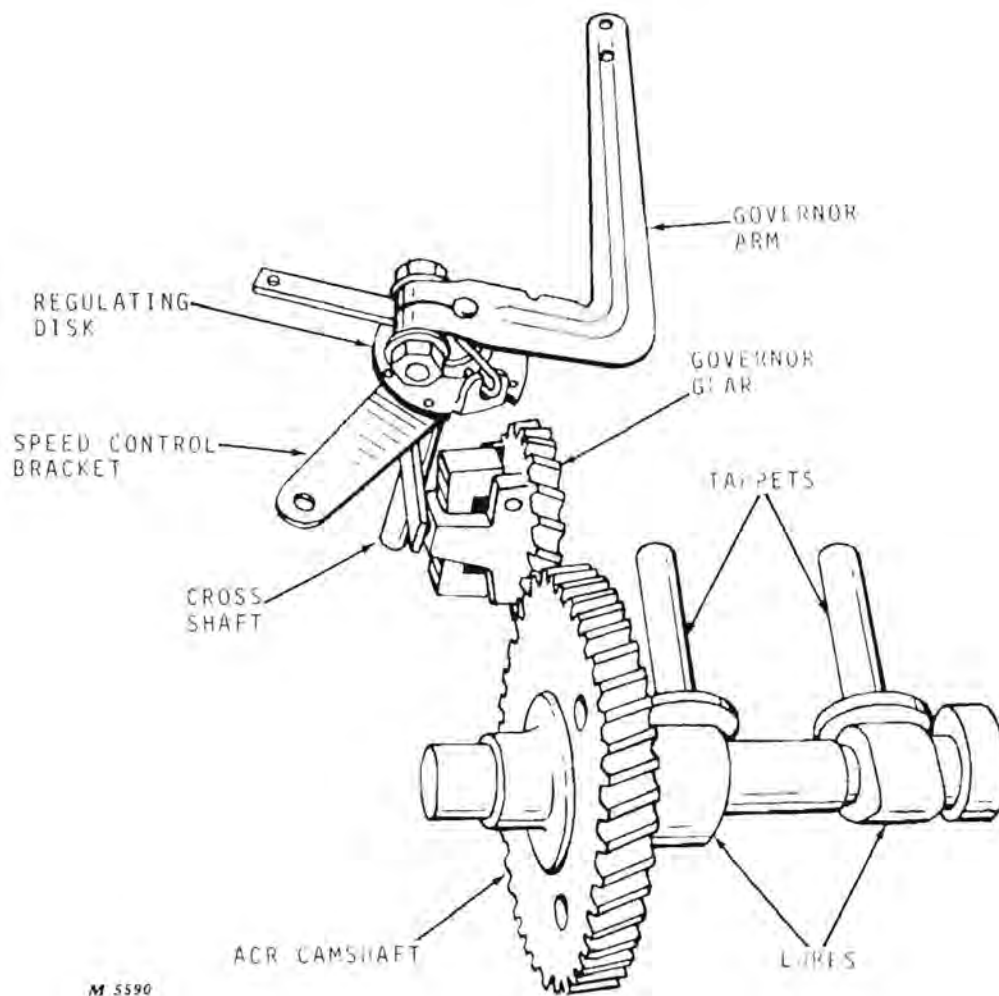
Assembled View of Camshaft, Tappets and Governor
